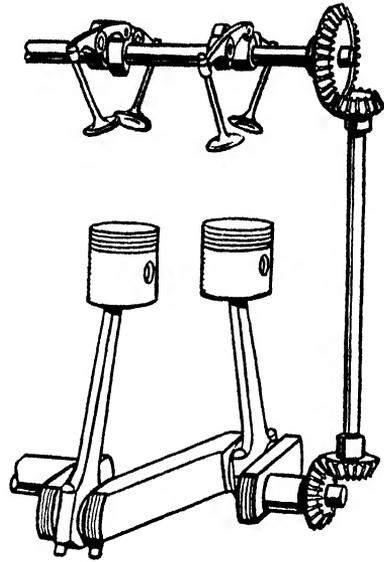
Overhead Cam-shaft driven by Bevel Gears and Vertical Shaft
